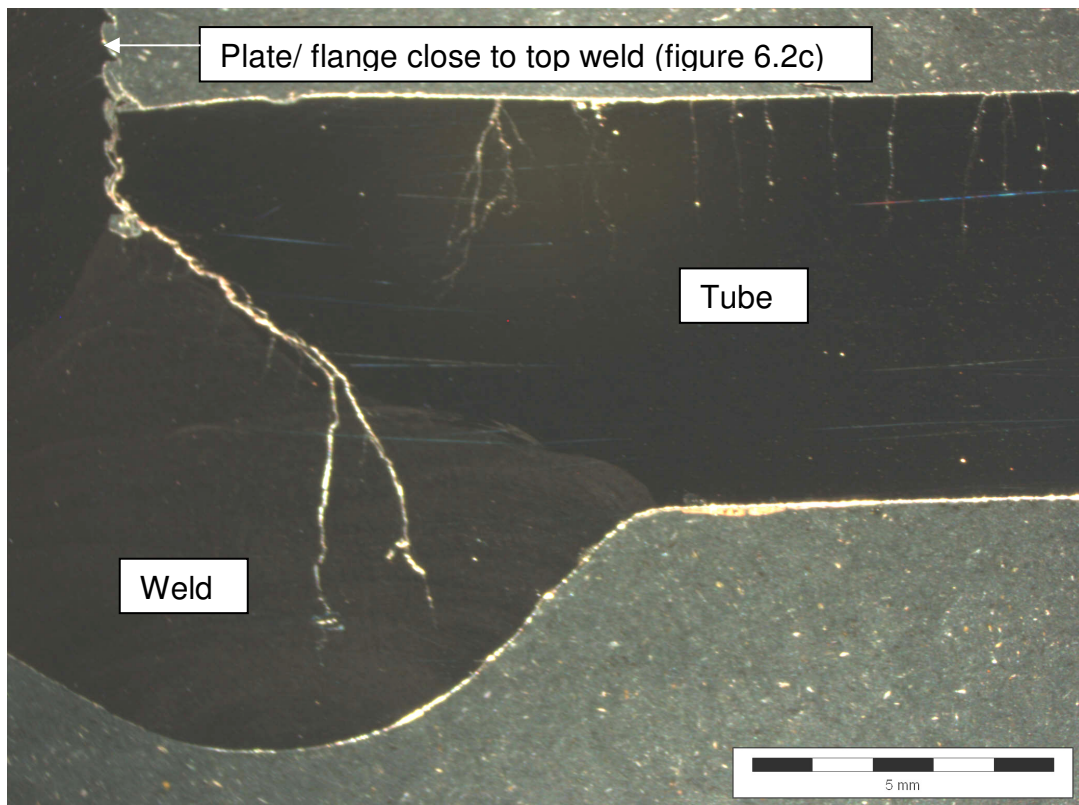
Cross-section of sample T3A top: crack initiated from the top weld root (between the end flange and the tubular sample).
